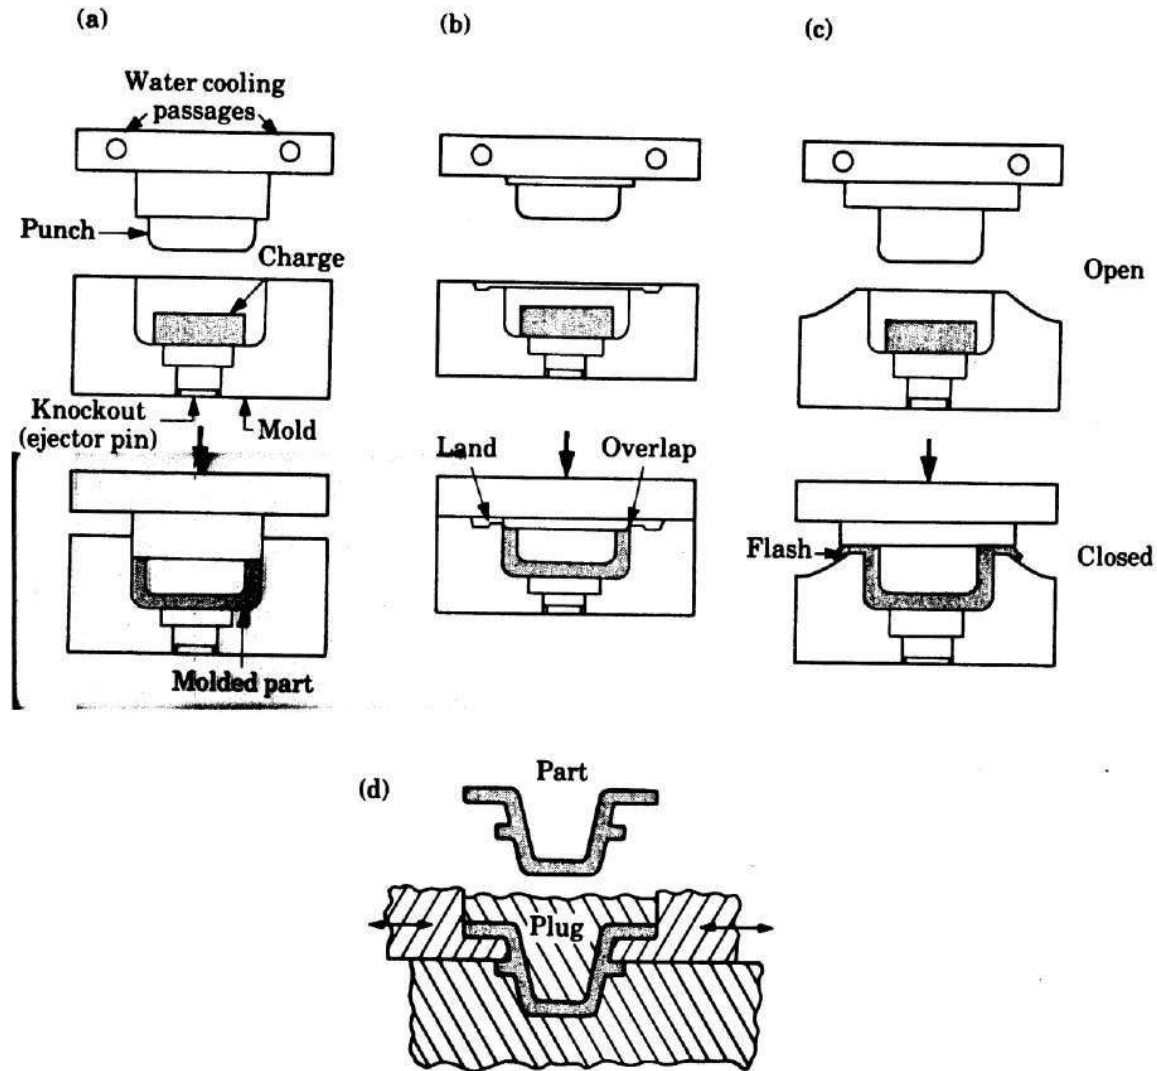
Types of compression molding, a process similar to forging: (a) positive, (b) semipositive, and (c) flash. The flash in part (c) has to be trimmed off. (d) Die design for making a compression-molded part with undercuts.
